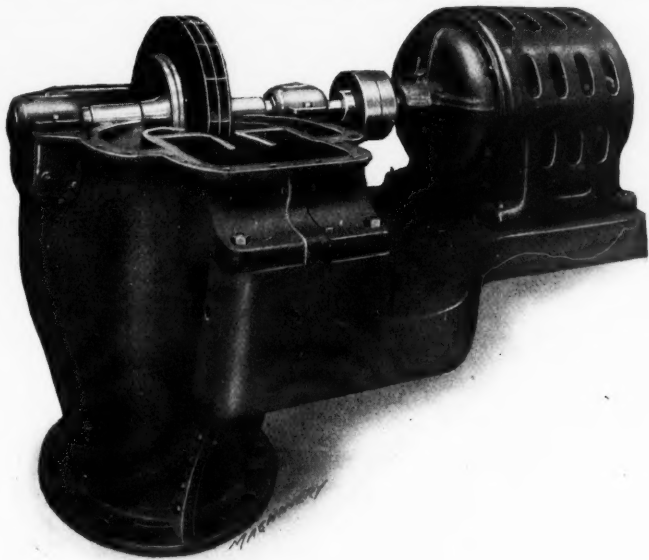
Turbo-blower shown in Fig. 1 with Casing removed
